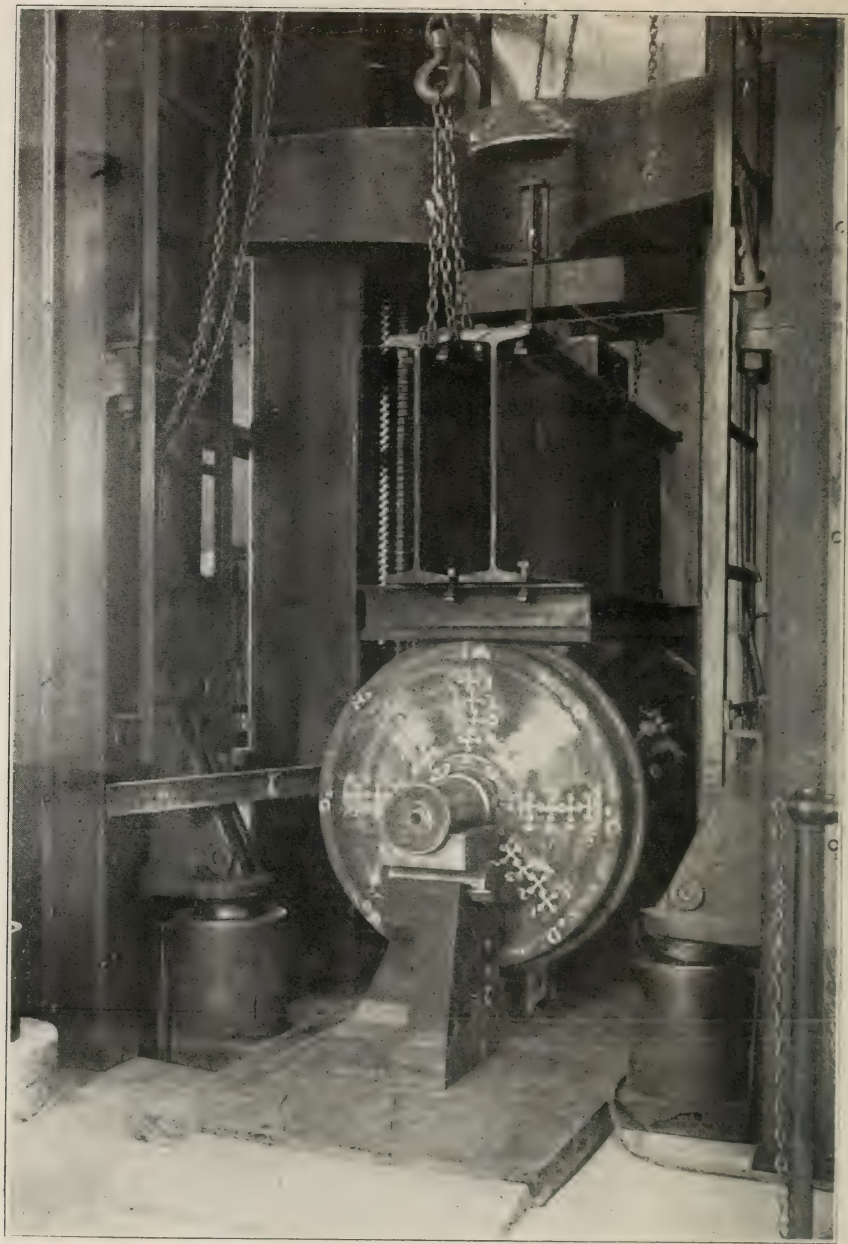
600 000-LB. TESTING MACHINE WITH PAIR OF WHEELS
